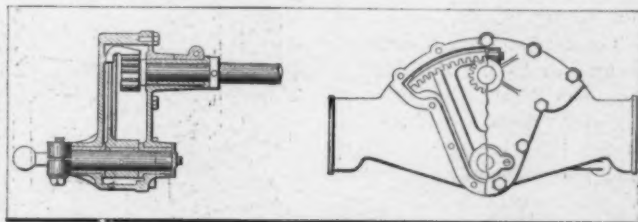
Steering gear, opened up to show pinion and sector, liberal bearings and grease tight housing
